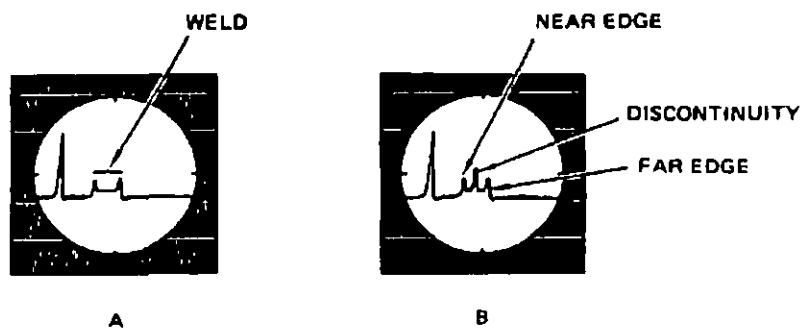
(18). Weld indications using angle-beam contact techniques.
